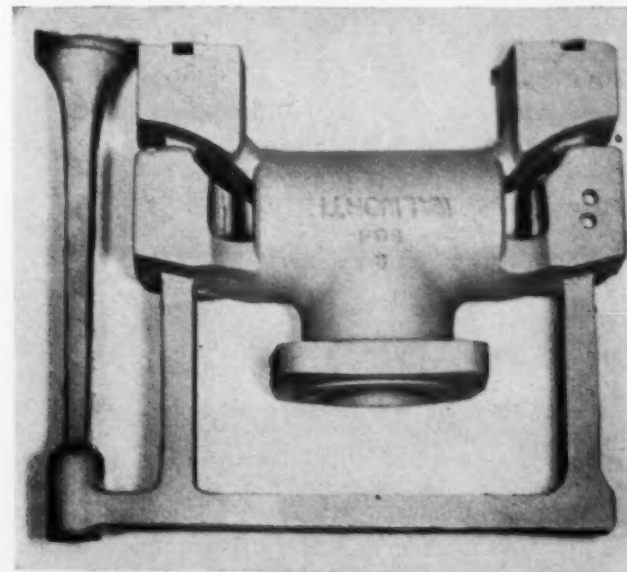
Same casting as shown in Fig. 1 and 2, made with low-carbon steel in a shell mold of silicon sand blended with 10 per cent granulated limestone, poured at 2900 F.
